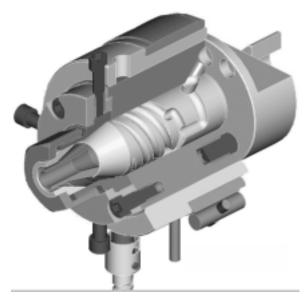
Crosshead extrusion die with spiral manifold. (Courtesy of StreamLine Extrusion)
